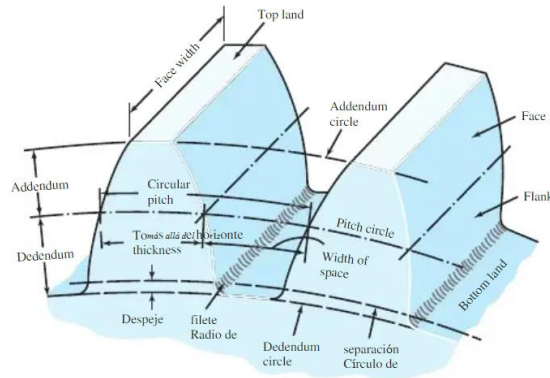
2: Tooth nomenclature spur gears²⁵
